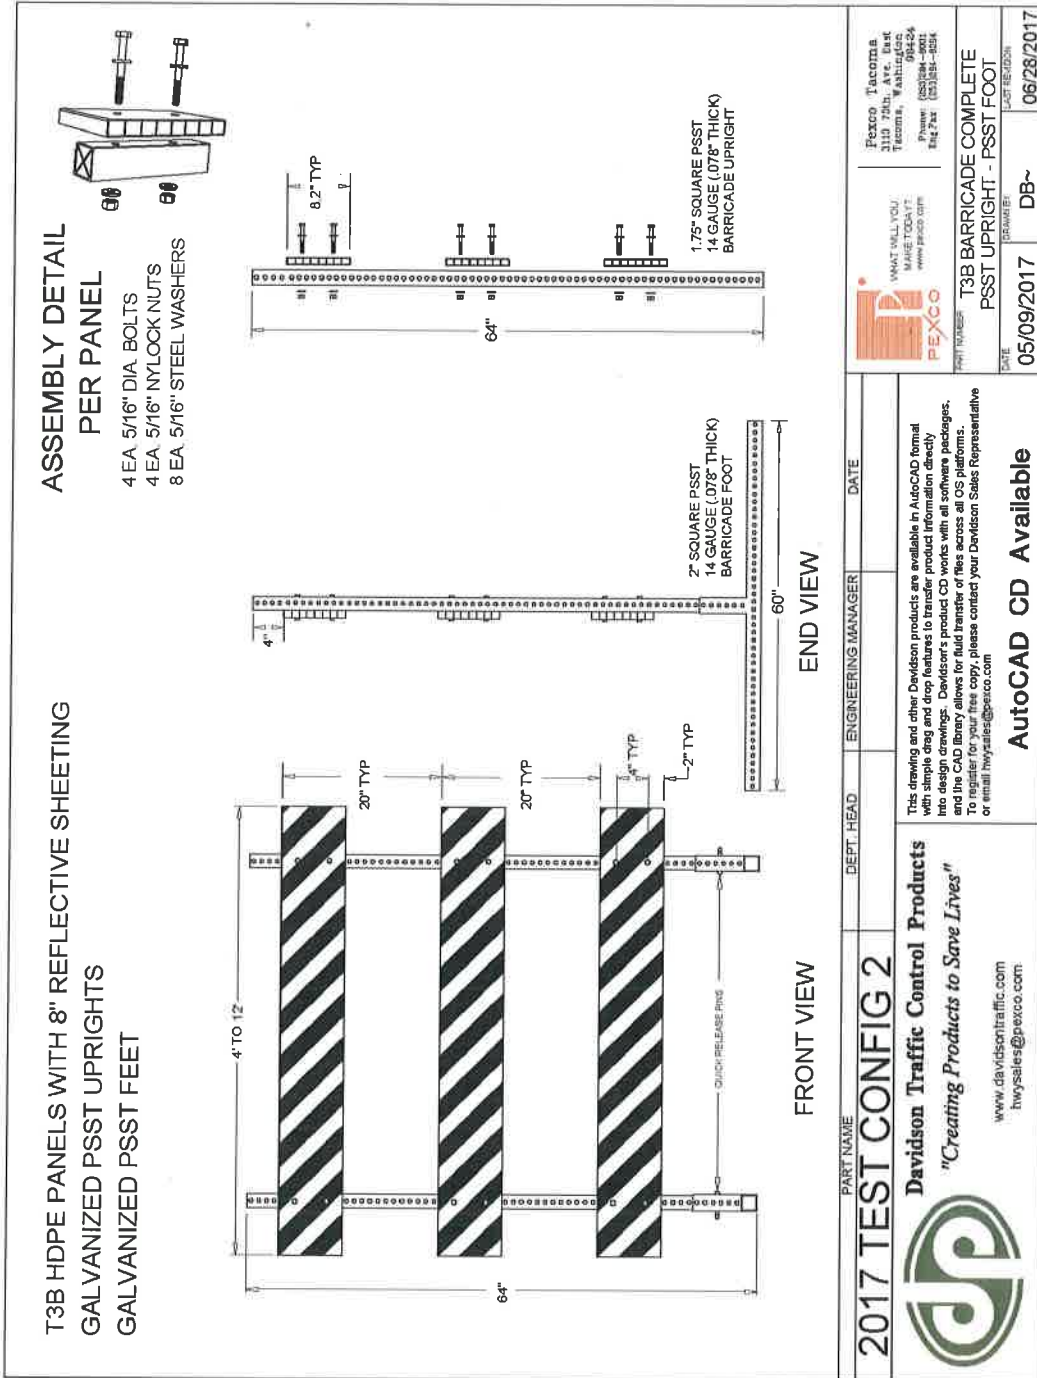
Pexco T3B Barricade with PSST Upright and Feet Technical Drawing
